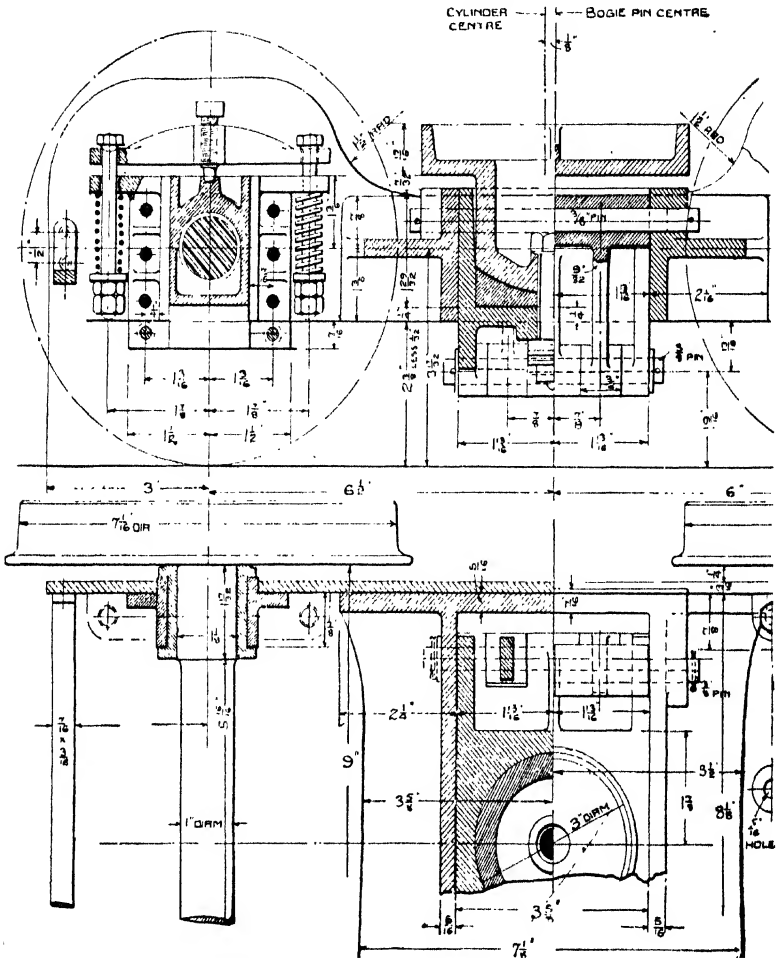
Model G.N.R. Swing-link Bogie for 9½-in. Gauge Locomotive. pivot is more or less of a universal joint, and the bearing springs are integral with the truck and stretcher casting.
